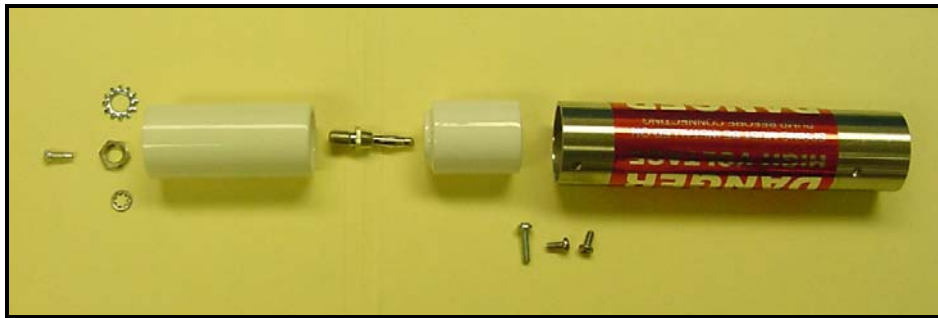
Cable Assembly and Parts Ready to Start Step 9
